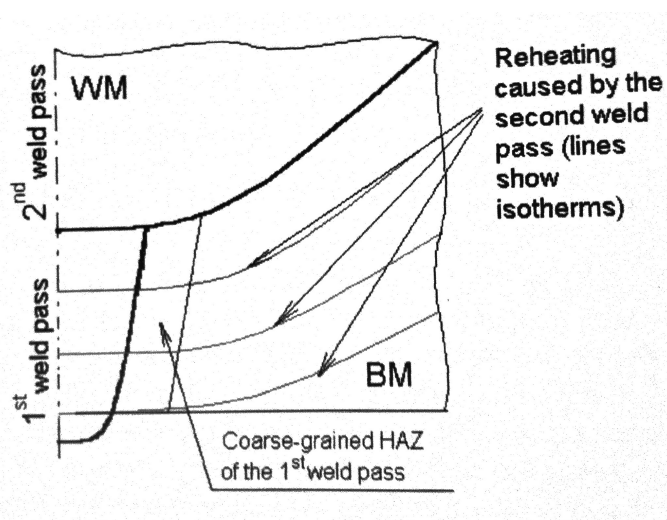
Schematic illustration of tempering of first weld pass from second weld pass: WM - weld metal; BM - base metal [16]
